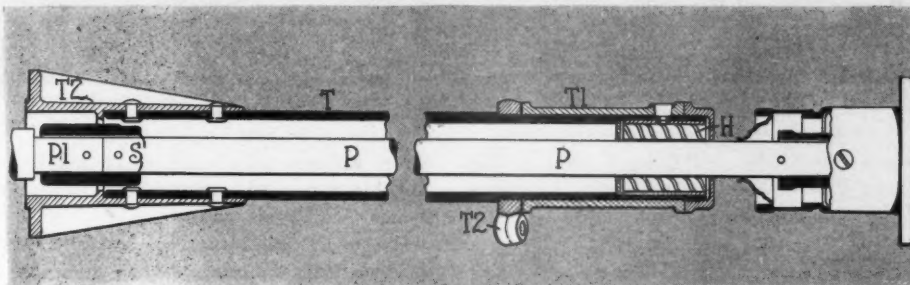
TORSION TUBE DETAILS OF OVERLAND
